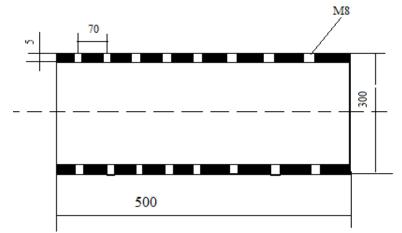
Cylinder with holes for mounting the dispensing heads and forming the recesses
